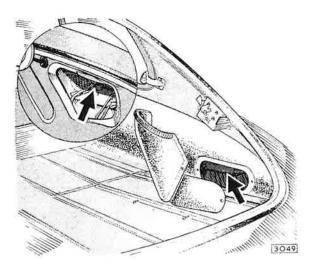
The location of the petrol pump. (Fixed head coupe). Inset shows location in open 2-seater model.
